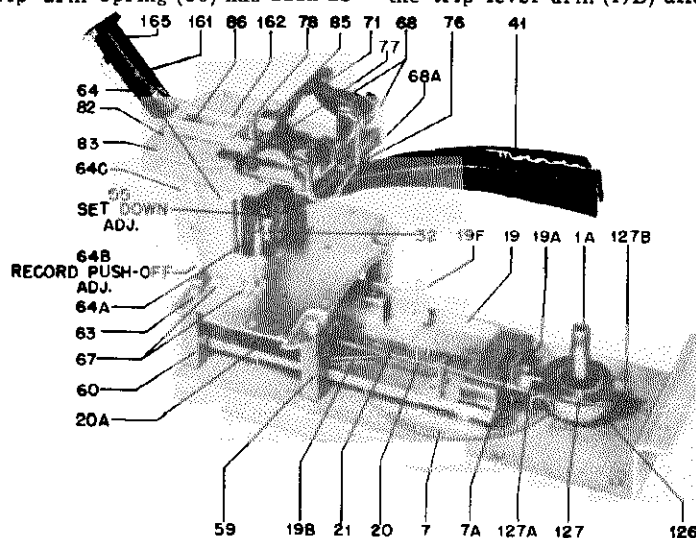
VIEW OF RECORD CHANGER WITH BASE & MOTOR ASSEMBLY REMOVED
